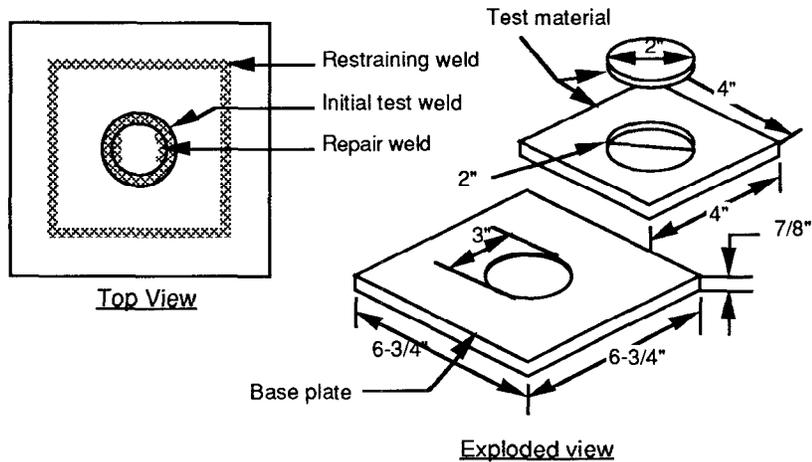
Schematic diagram of the Pierce-Miller Patch Test. The square blank is GTA-welded to the restraining block, and the patch is welded in place. The repair welds are done after the heat-treatment cycle.
